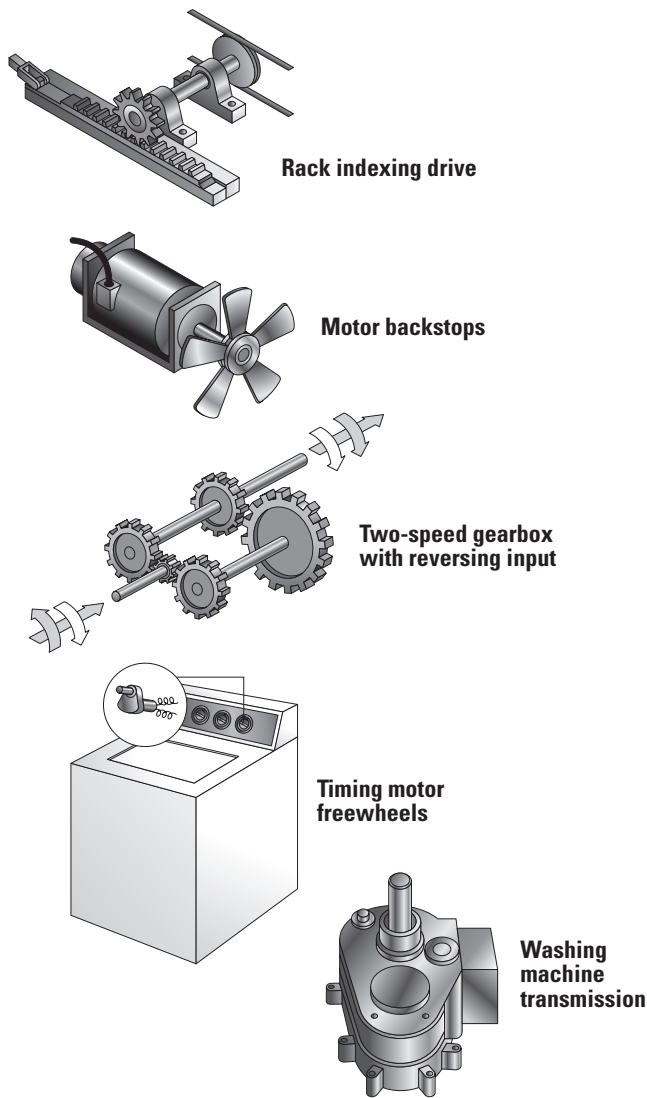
(2). Drawn cup clutches and clutch and bearing assembly applications
